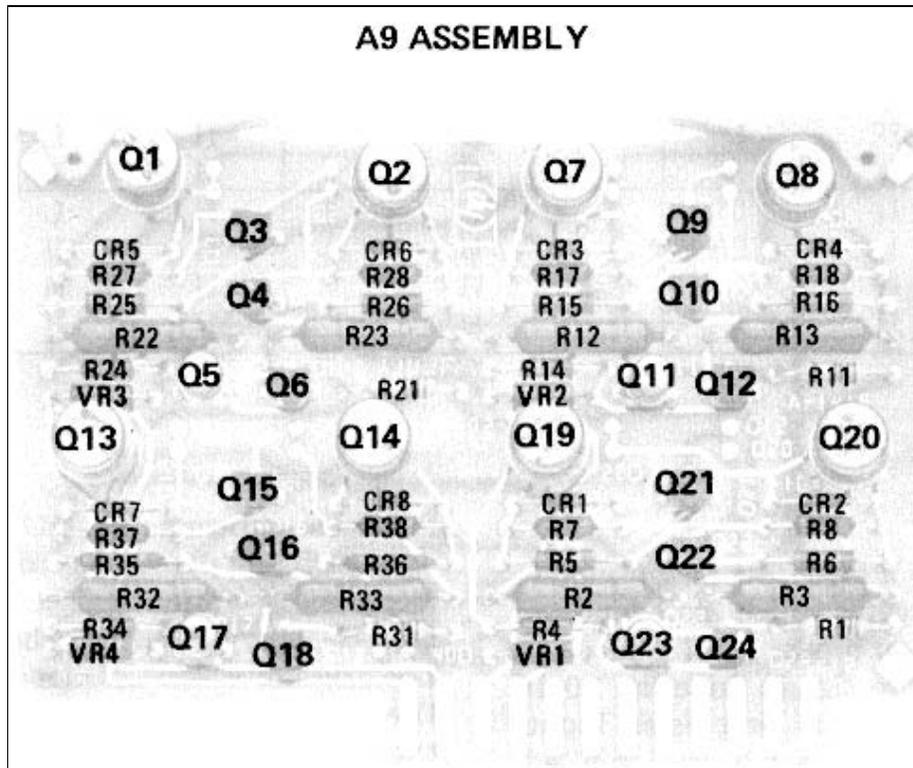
A9 Attenuator Driver Assembly Component Locations.
